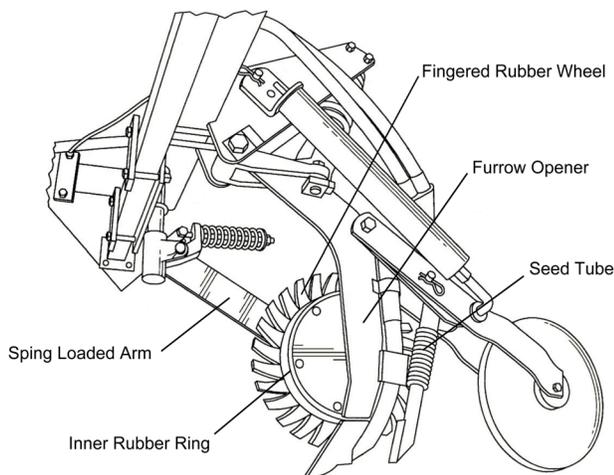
Residue management wheel assembly in operating position next to furrow opening shank of hoe-type seeding unit.
